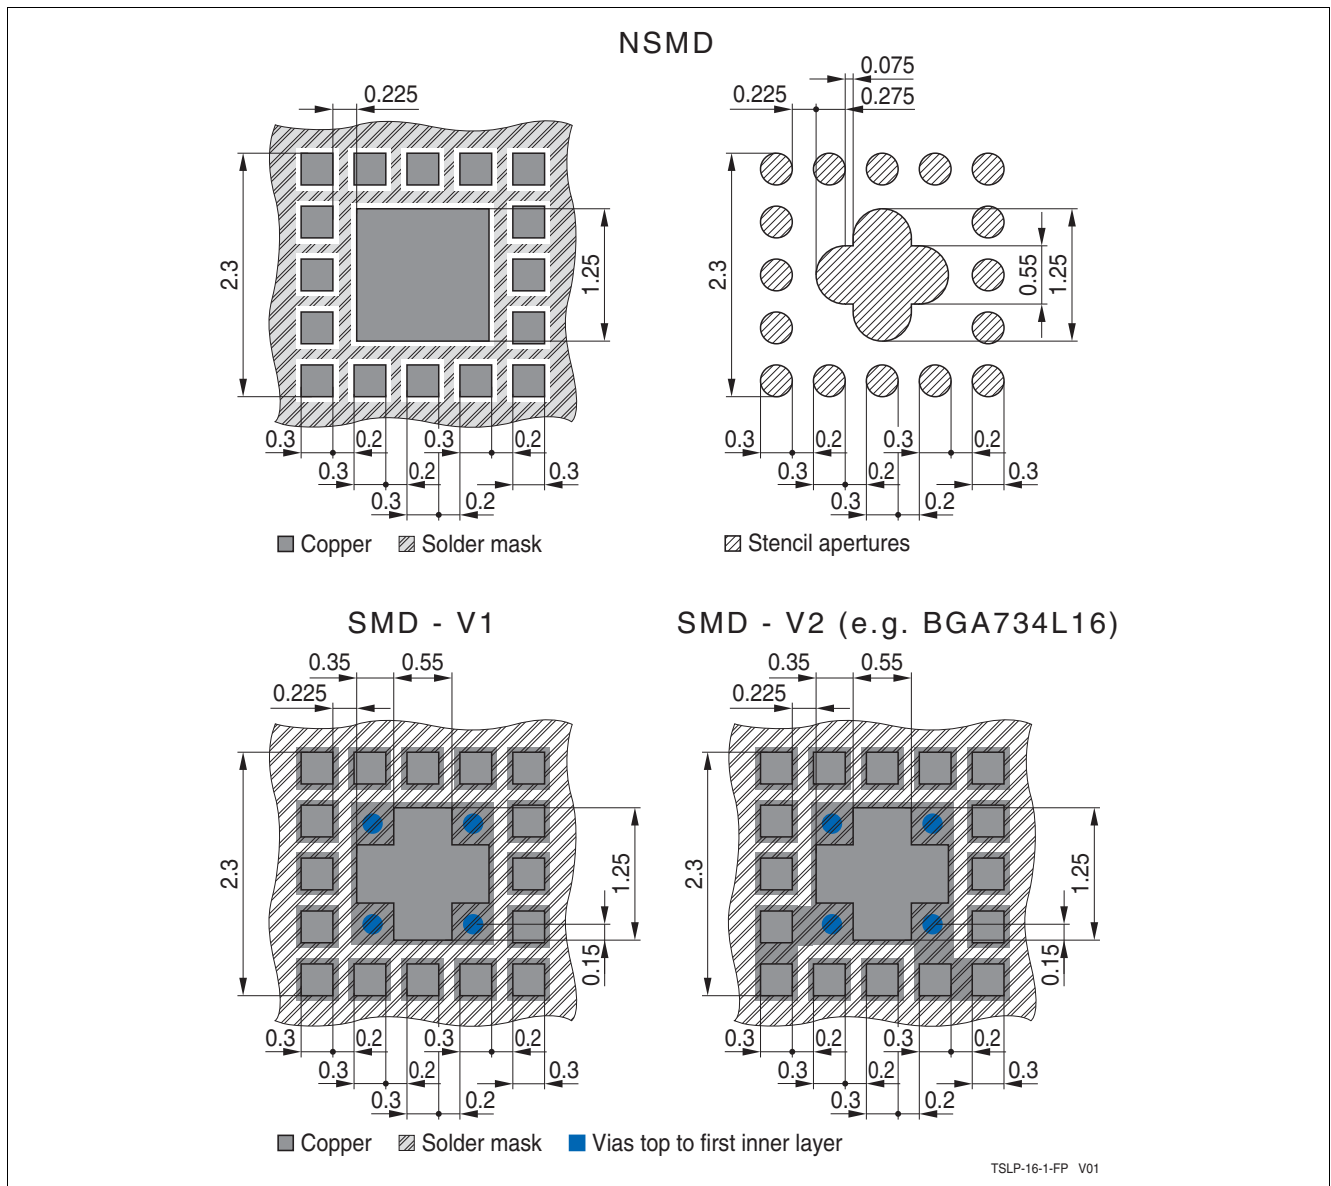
Recommended Footprint and Stencil Layout for the TSLP-16-1 Package
